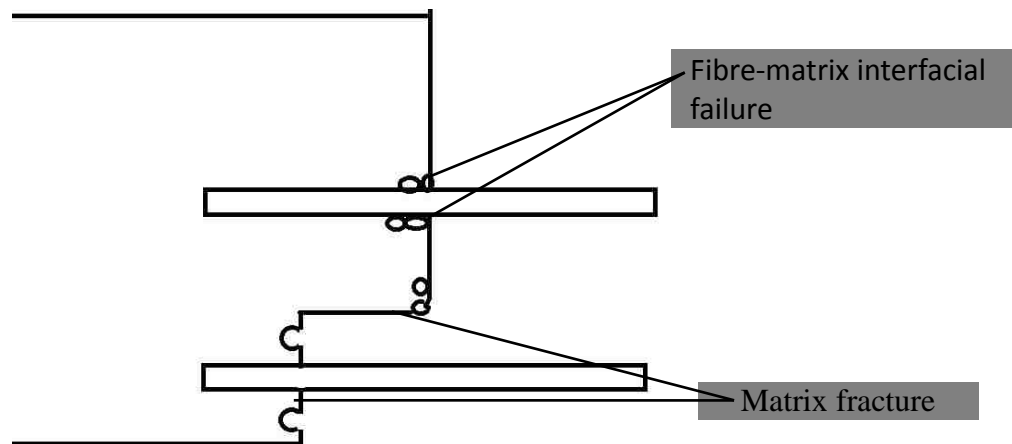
Cells on the welding surface would weaken the part joining and fibre-matrix bonding
